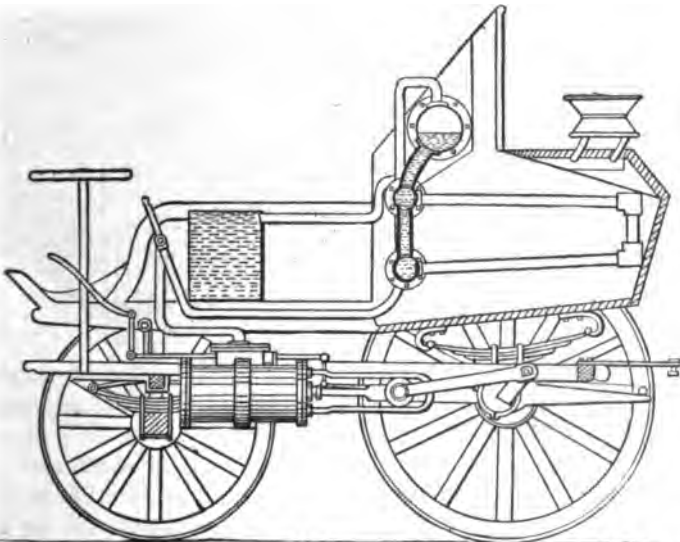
Sectional Elevation of one of Goldsworthy Gurney's Early Coaches, showing water tube boiler, directly geared cylinders and peg-rod driving wheel.
